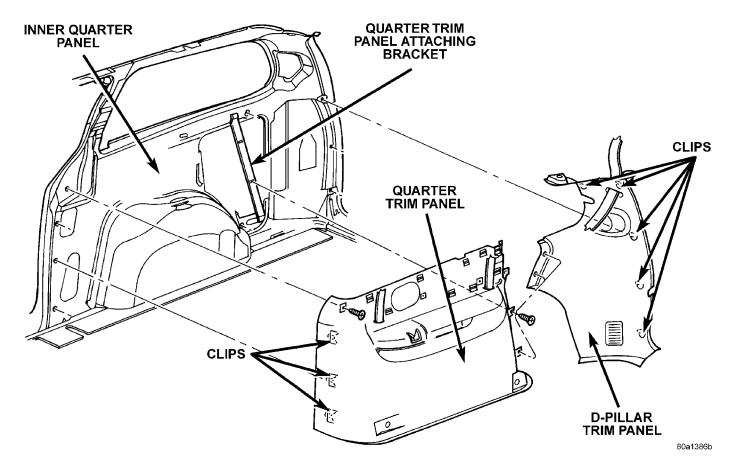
Right Quarter and D-Pillar Trim Panels—SWB
